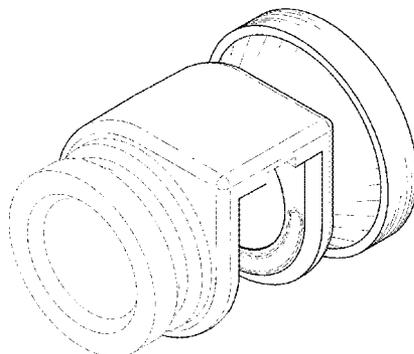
is a rear, bottom, and right side perspective view thereof;
